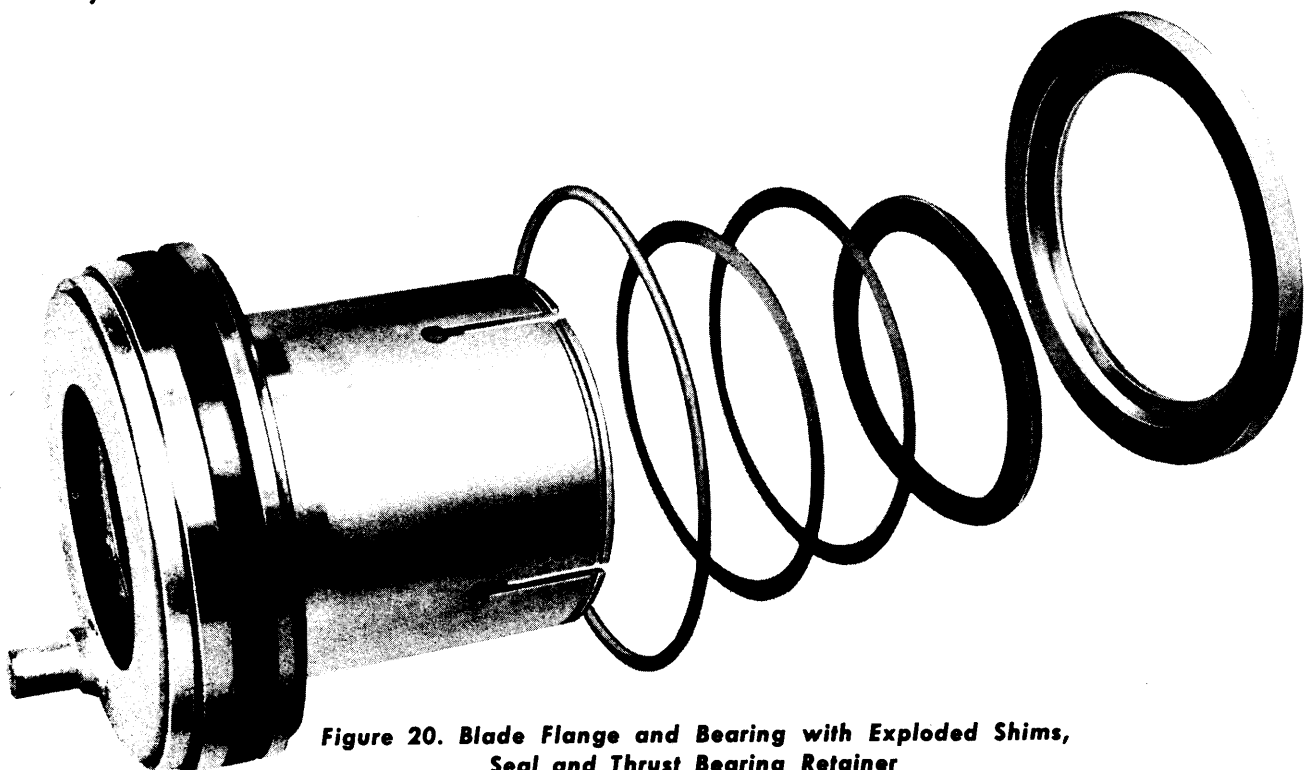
Blade Flange and Bearing with Exploded Shims, Seal and Thrust Bearing Retainer
